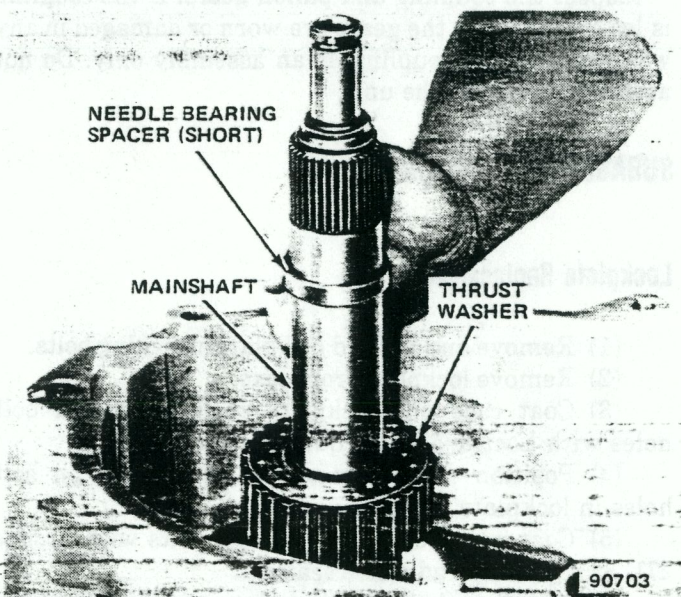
D-64 Mainshaft and Thrust Washer Installation
